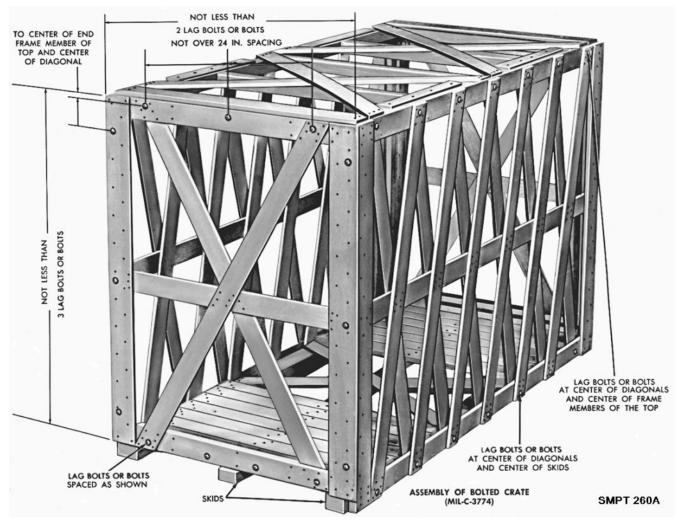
Assembly of open bolted crate (MIL-C-3774).
